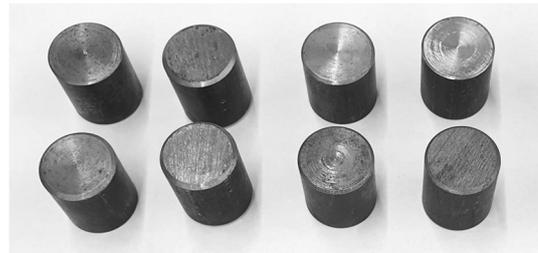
Experimental workpieces made of medium alloyed carbon steel C45
